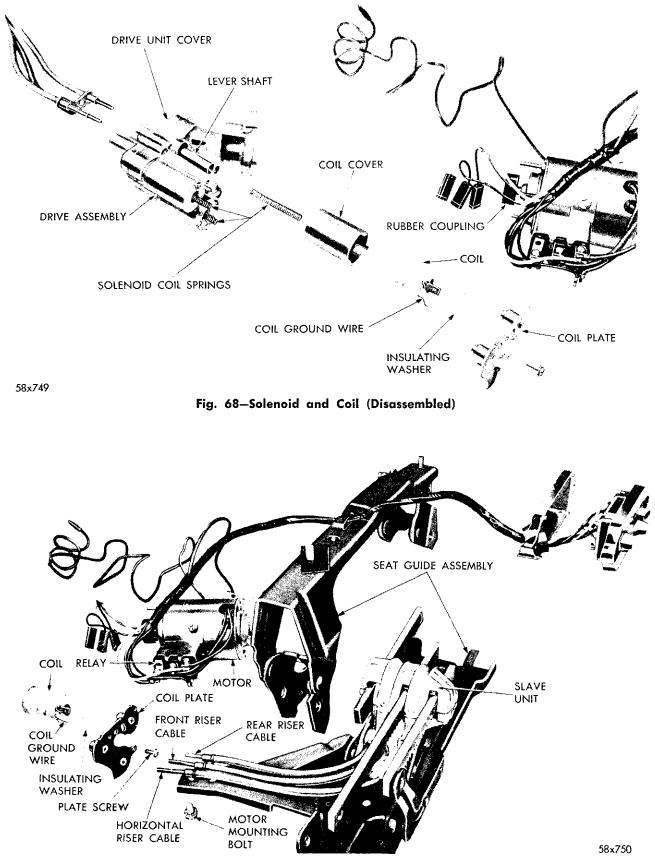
Seat Track and Motor (Disassembled) (Typical View)
